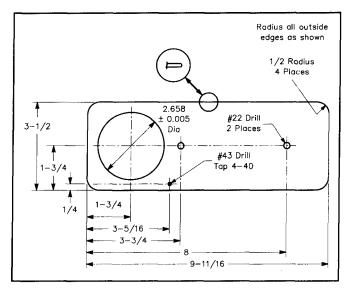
Plate line of the single 3CX800A7 amplifier. Except as noted on the drawing, dimensions are \pm 1/32 in. Material is 1/16-in. copper or brass. Anode hole is sized for the EIMAC 720829 collet. Dull-finish (nickleless) silver plating is recommended after the collet is soldered in place.
